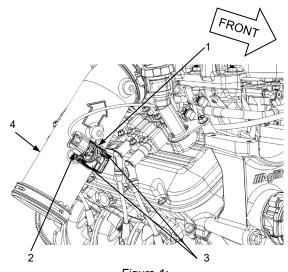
Mass Airflow (MAF) Sensor (1), MAF Sensor Electrical Connector (2), MAF Sensor Mounting Bolts (3), Intake Air Tube (4)
